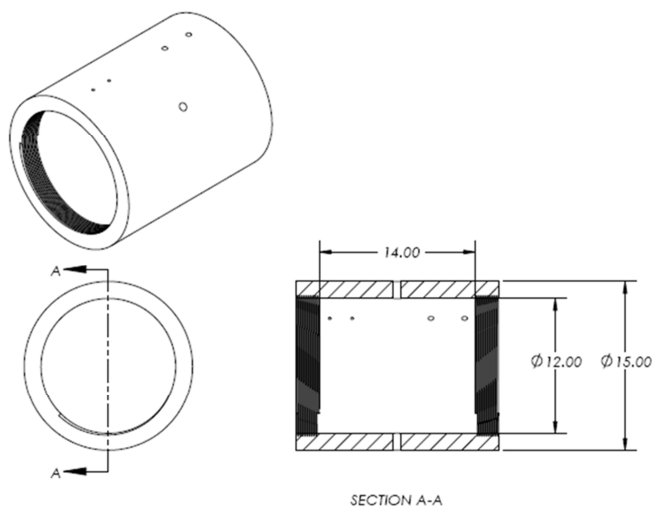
Drawing for flame speed vessel with dimensions shown in inches.
